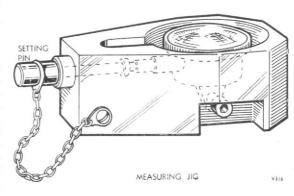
Equipment for checking impeller/diffuser casing clearance.
